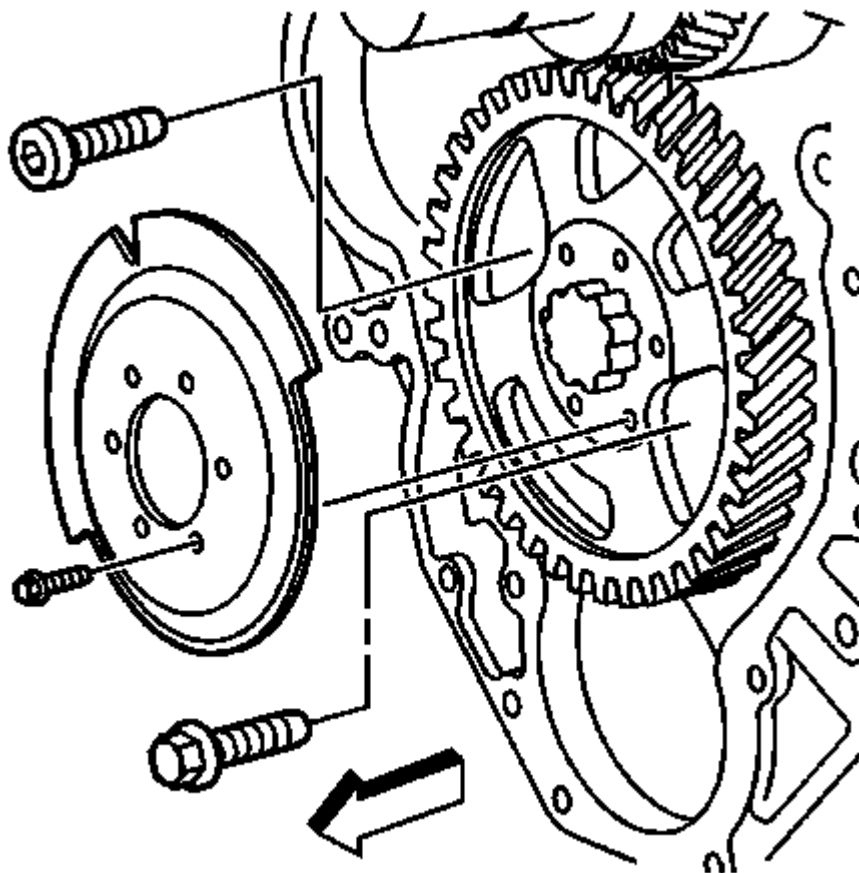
View Of Camshaft Exciter Ring, Bolts & Thrust Plate Bolts
